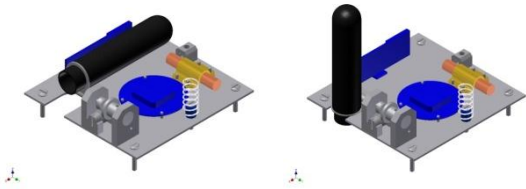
Parachute deployment mechanism without enclosure lid (showing both spring deployed and stowed RF beacon)
